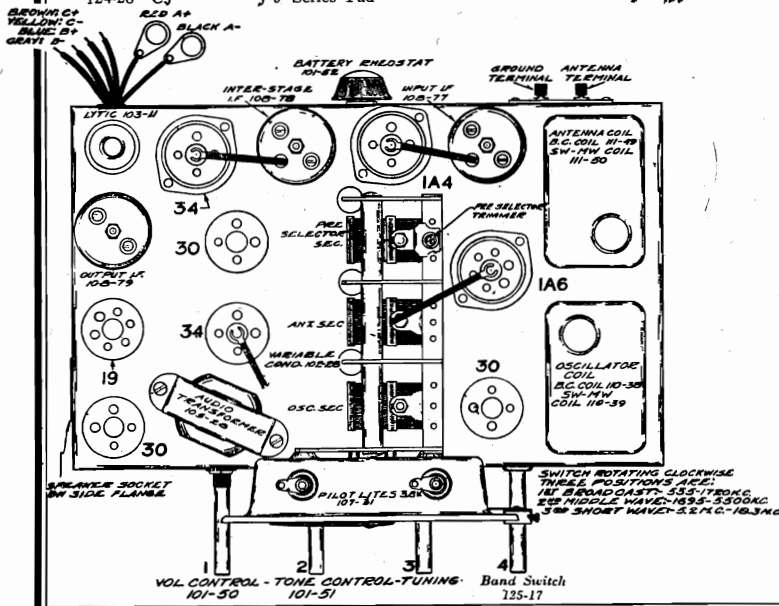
BOTTOM VIEW SHOWING TRIMMERS
